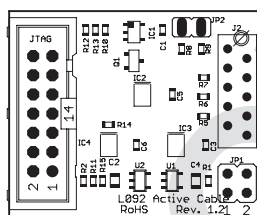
MSP-TS430L092 Active Cable Target Socket Module, PCB
